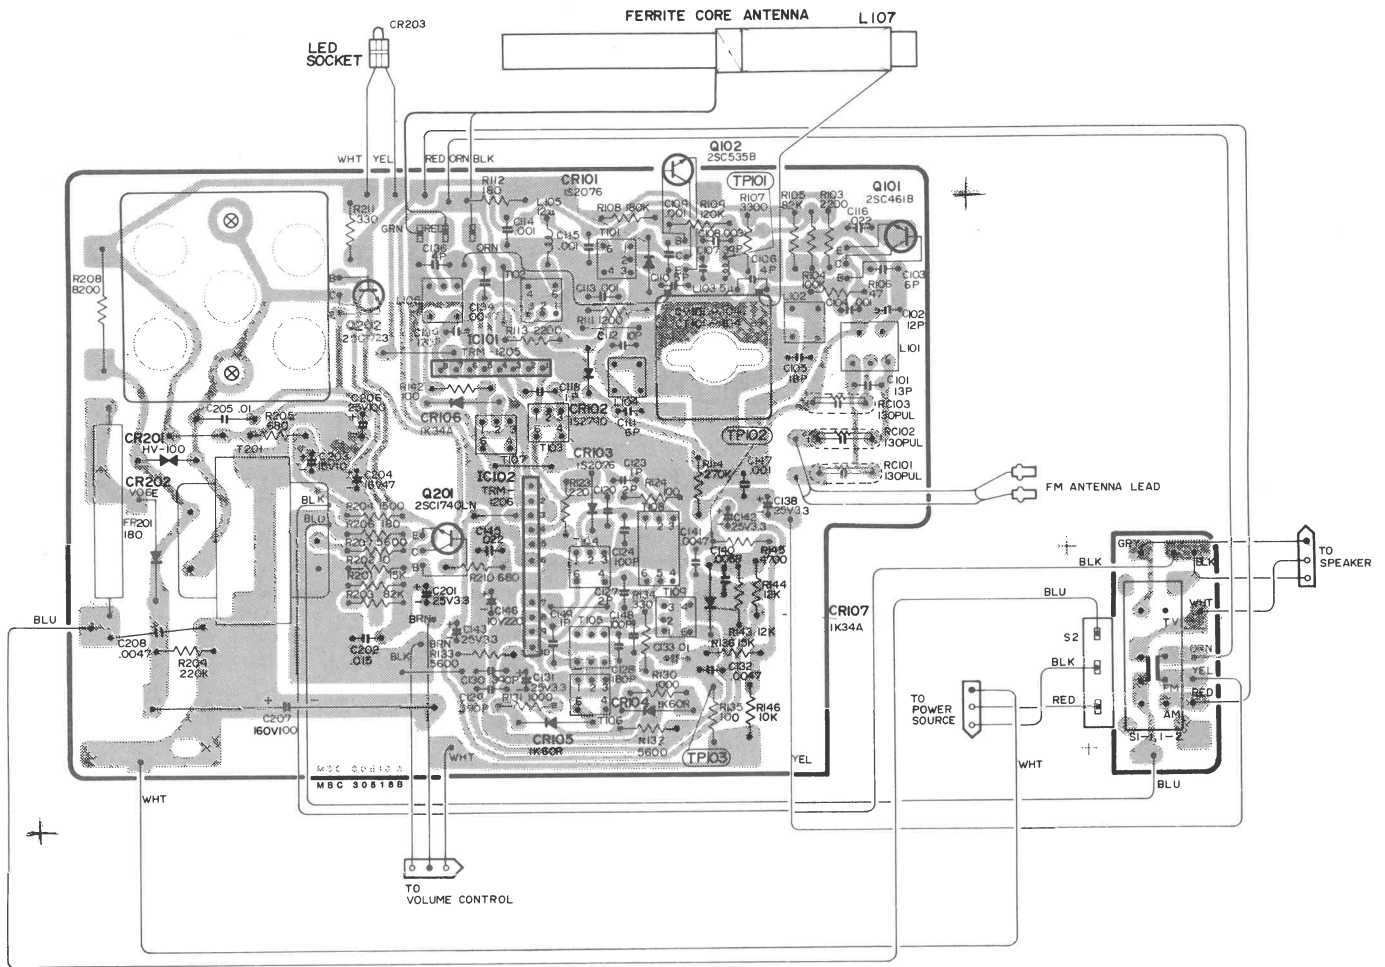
RC 3042 Circuit Board View (JJR 955)
